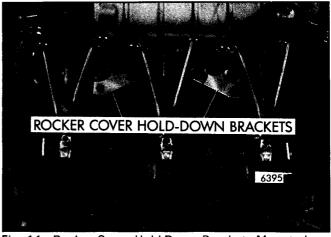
Rocker Cover Hold-Down Brackets Mounted on Rocker Arm Shaft Brackets
